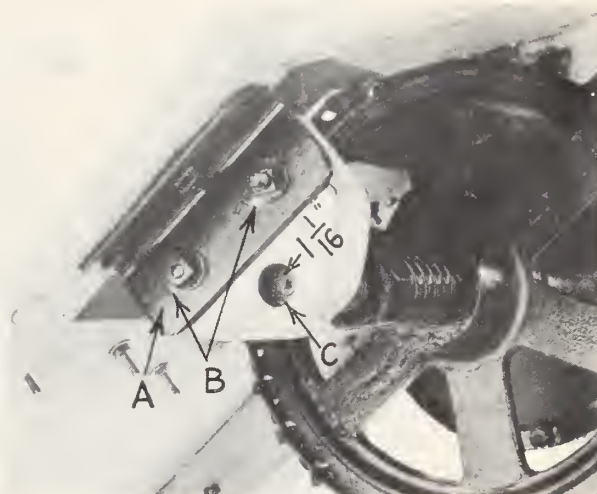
Countershaft outboard bearing. A, Angle iron, $\frac{1}{4} \times 1\frac{1}{2} \times 2\frac{1}{2} \times 6$ inches. B, Slots to tighten chain, $7/16 \times 1-3/8$ inches. C, $1\frac{1}{2} \times 4 \times 5$ inch maple bearing, hole $1-1/16$ inches in diameter.
